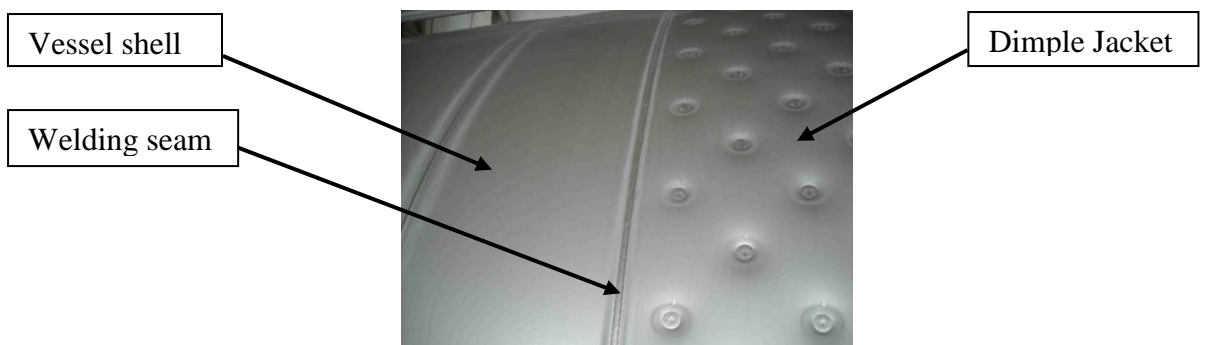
Dimple jacket welded and pickled on vessel shell
